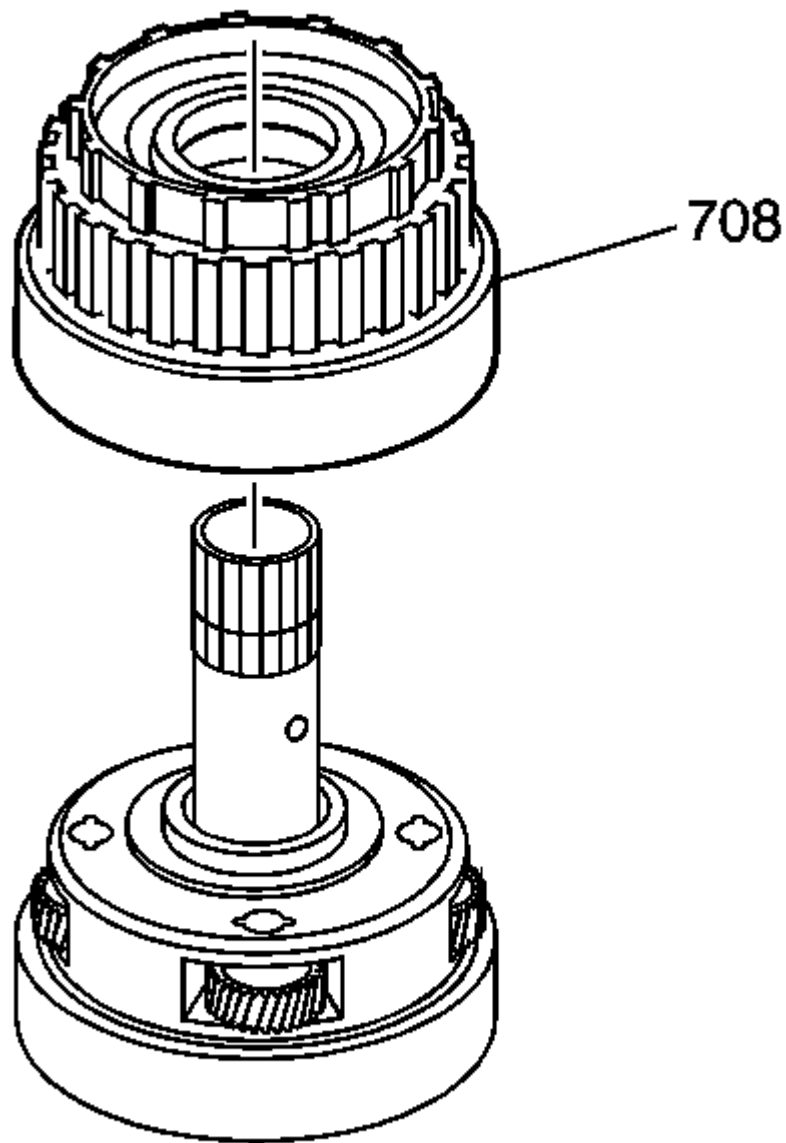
Identifying Input Carrier With Input Internal Gear And Flange
